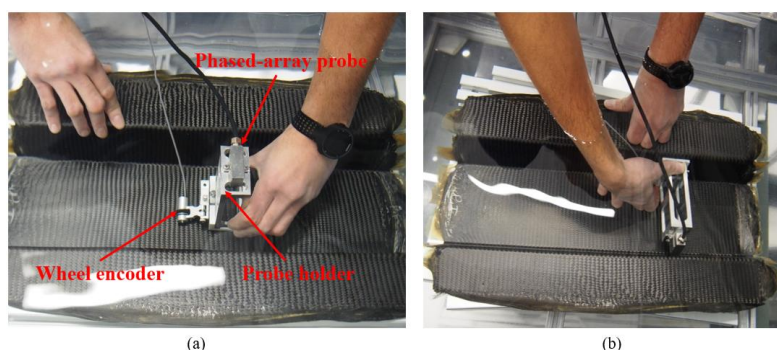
Experimental setup used for ultrasonic inspection of the omega-shaped composite parts: (a) inspection of the top flange (Zone 1); (b) inspection of the left vertical flange (Zone 2).
